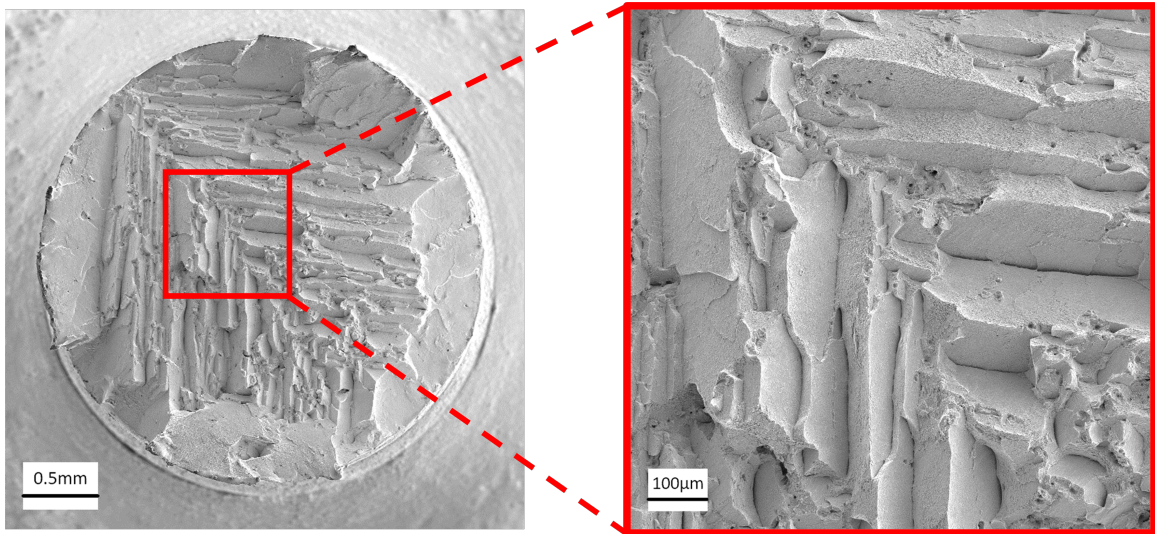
Fracture surface of STAL15 $\langle 001 \rangle$ at 725 °C.
